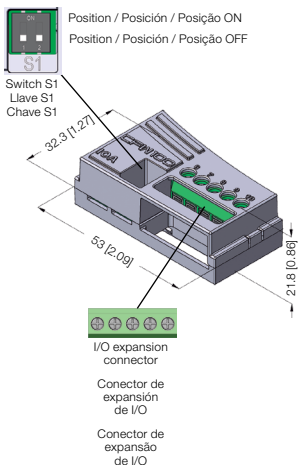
CFW100-IOA dimensions in mm [in] and connectors location
